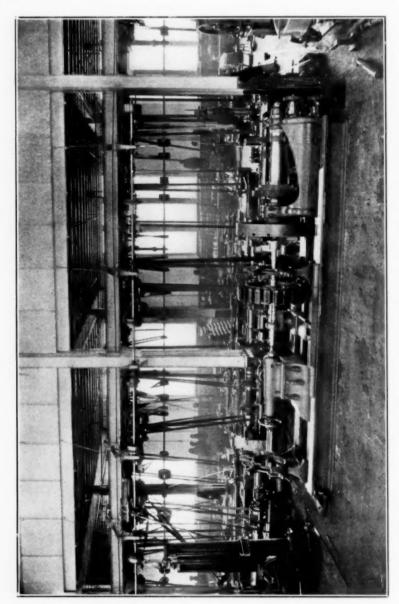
Lathe, with Motor in Headstock Beneath Spindle
